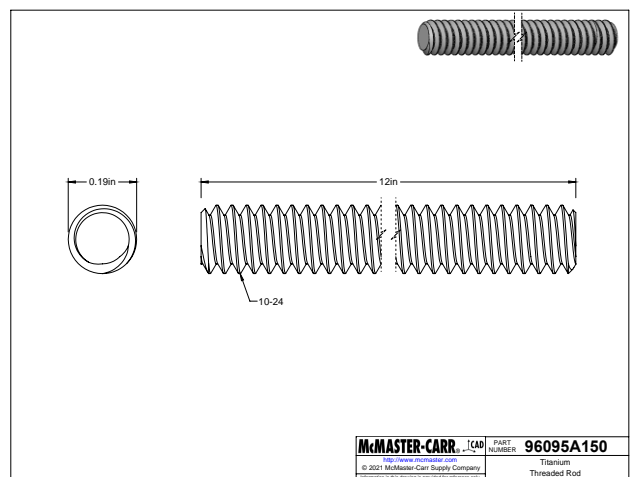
THREADED ROD ALTERNATE DRAWING
